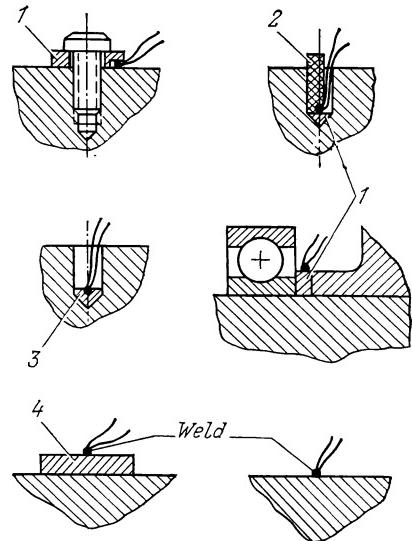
Methods of securing the thermocouple for measuring the temperature of machine tool components:
